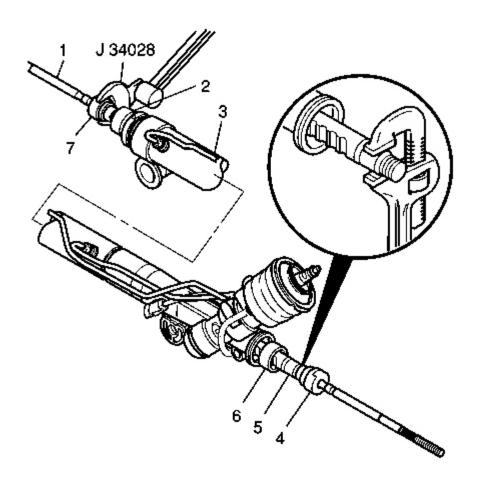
View of Shock Dampener, Female/Male Inner Tie Rod and Inner Tie Rod Housing with J 34028
